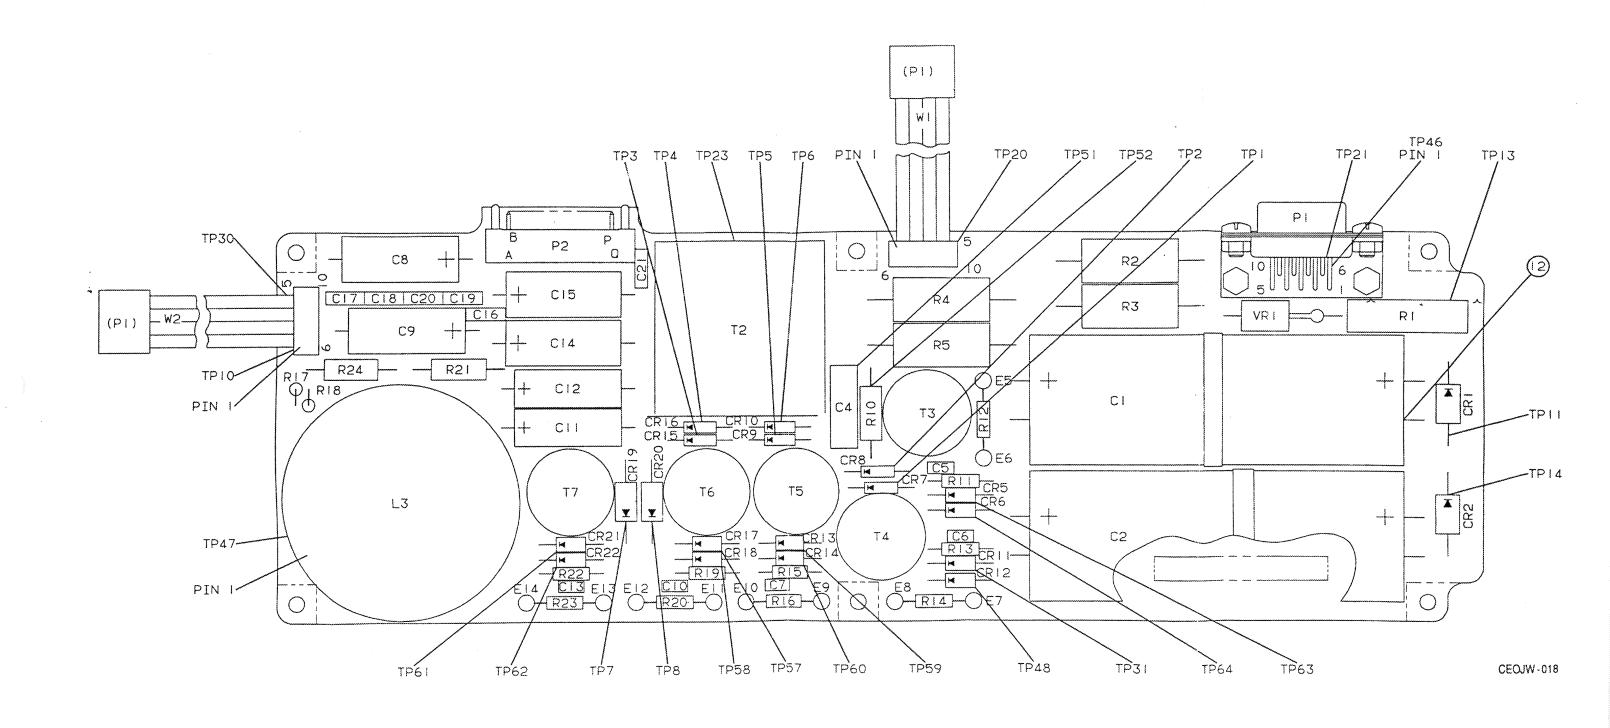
Test Points for PS Regulator Output PS1A3 (Sheet 1 of 2)
